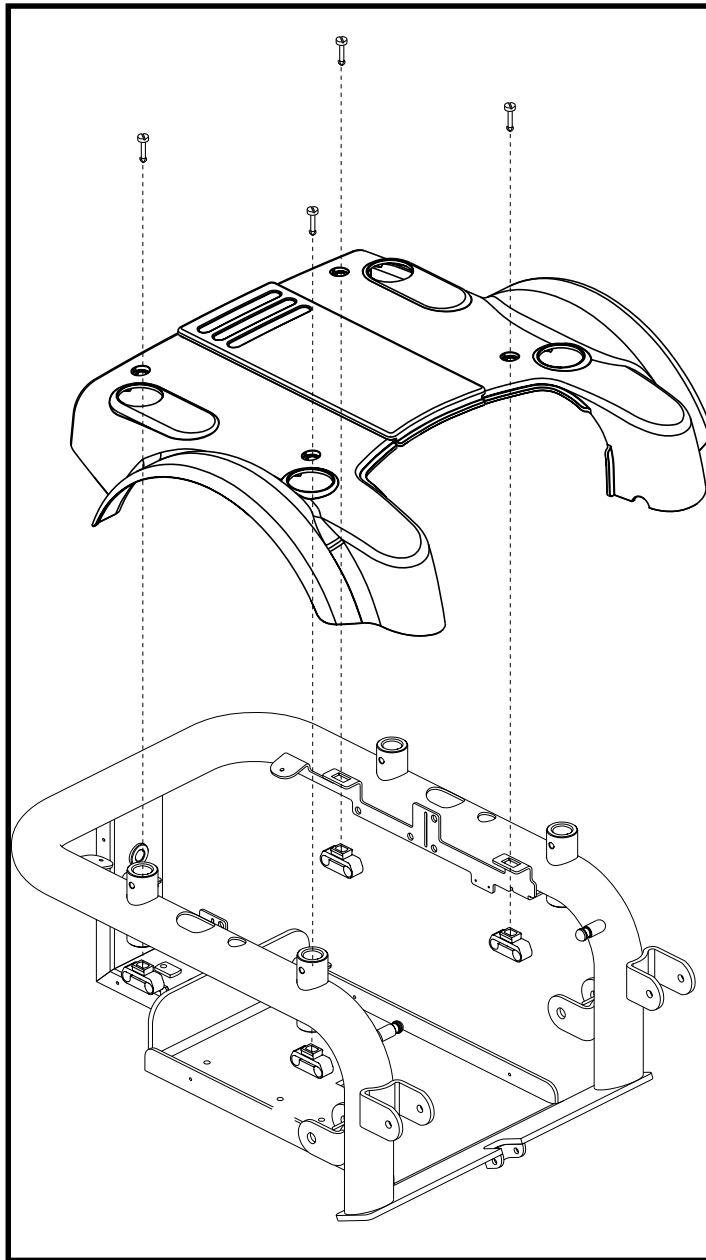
Jazzy 1121 Shroud Disassembly/Assembly
